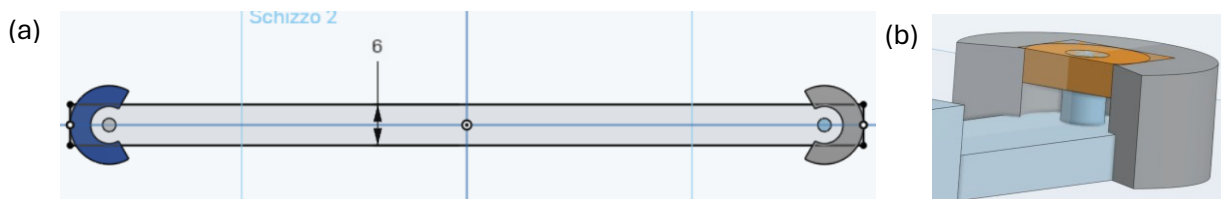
protection system, top view drawing (a) and close-up of the enclosed 3D model (b)
